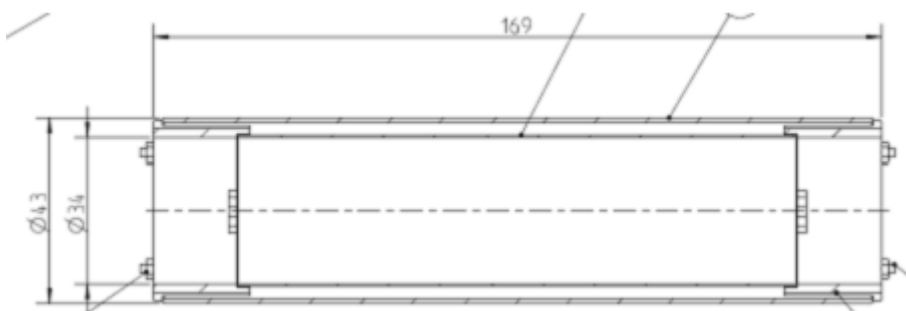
shield assembly with CryoPerm cylinders clamped between Teflon collars
